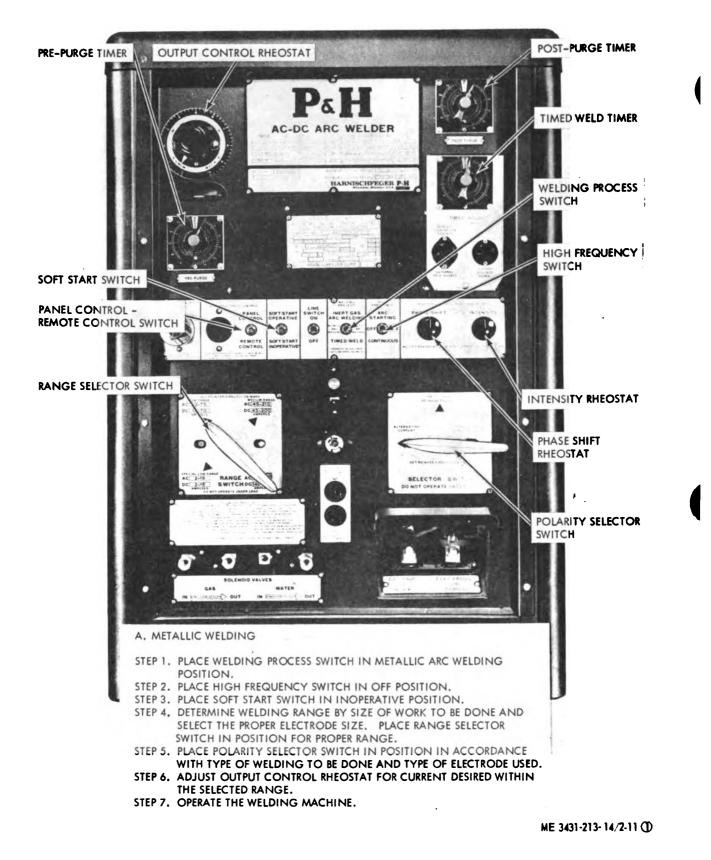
(). Welding machine operation, Model 2100H2007.
